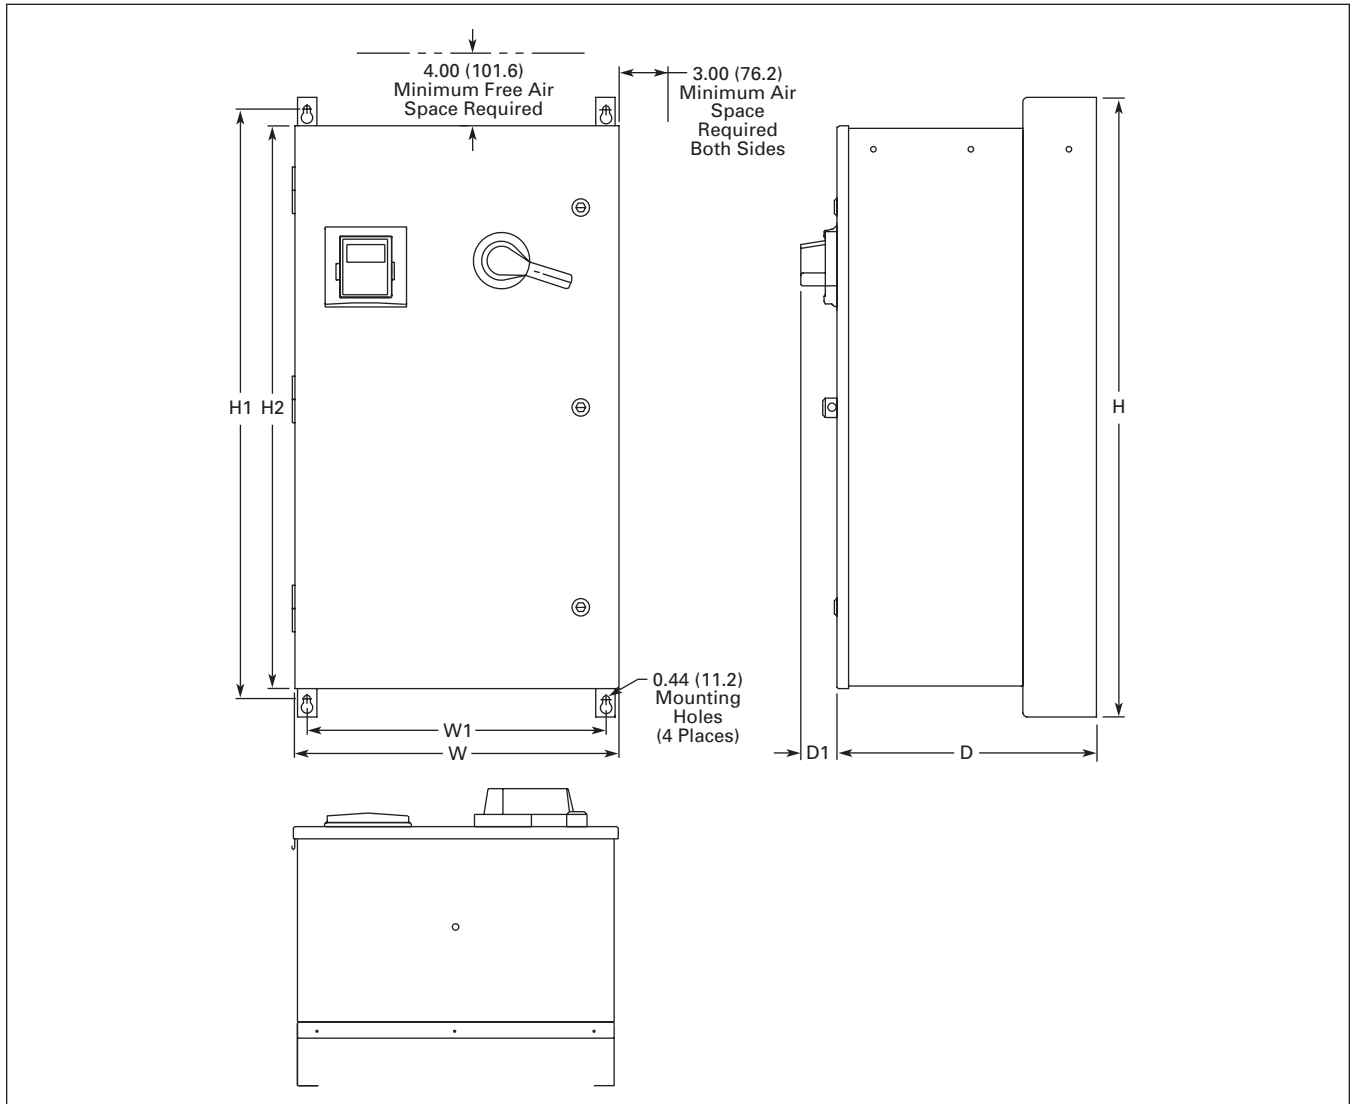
Enclosure Size B—UL Type 12—Approximate Dimensions in Inches (mm)
